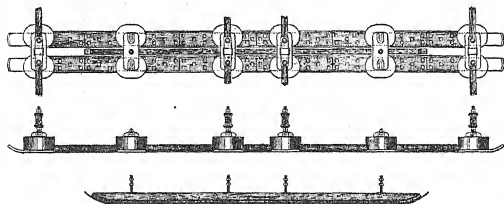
Plan and elevation of Lorain skate collector and magnet.
